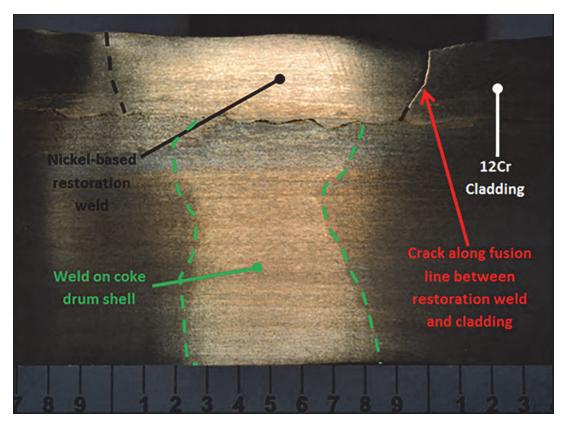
Circumferential Weld Crack Between the Nickel-based Restoration Weld and 12Cr Cladding
